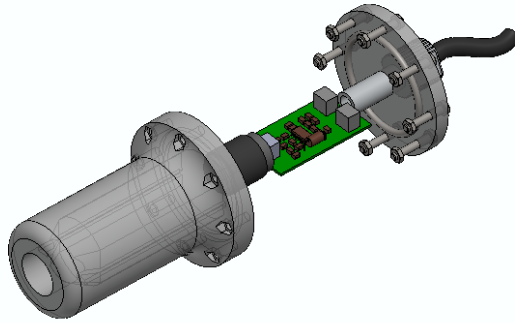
Exploded view of the final transmitting system. Photo credit: PoliTOcean mechanical team
